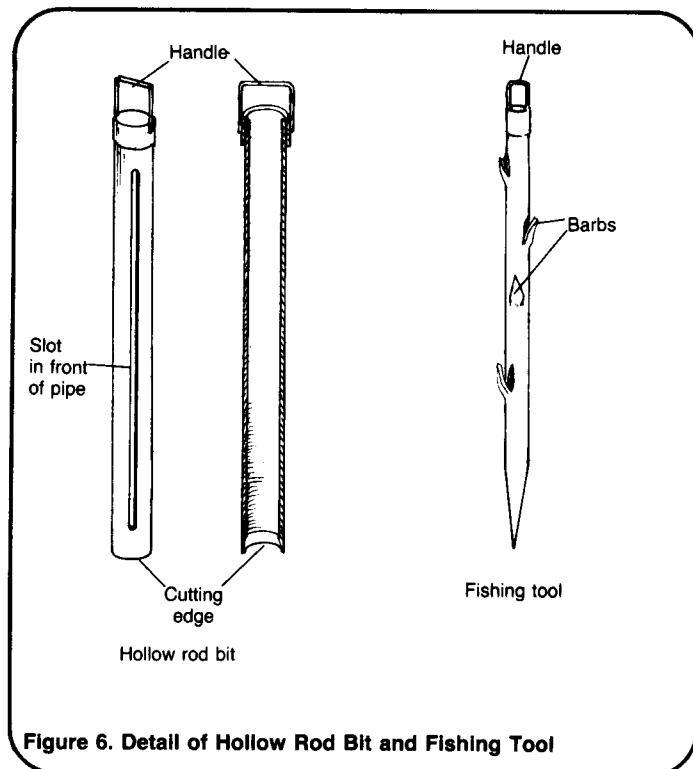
Detail of Hollow Rod Bit and Fishing Tool
